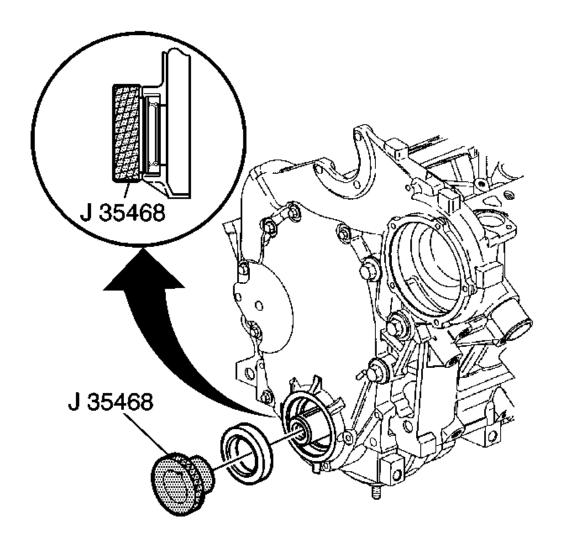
Installing Crankshaft Front Oil Seal Courtesy of GENERAL MOTORS CORP.
